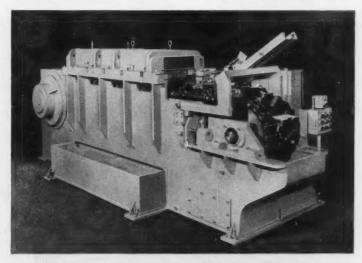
Tunnel type continuous broaching machine introduced by Lapointe Machine Tool Co.
